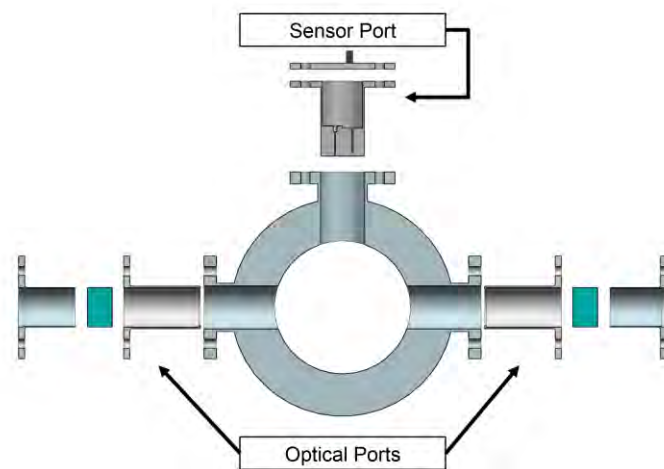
Exploded view of the sensory and optical ports on the combustor
